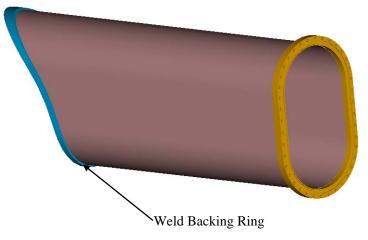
Typical Vacuum Vessel Port Extension ready for welding
